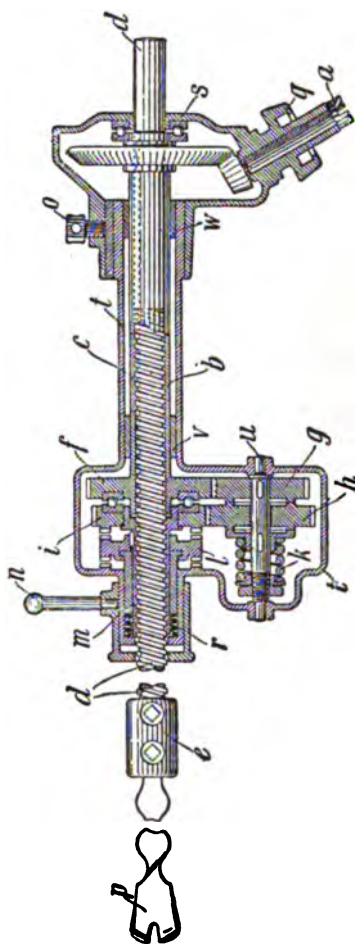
Section of Siemens' Rotary Drill to be driven by Flexible Shaft from a Motor on the Ground. *a* is the Flexible Shaft, *b* the Screw giving Motion to the Drill, *d* the Drill Shaft, etc.
